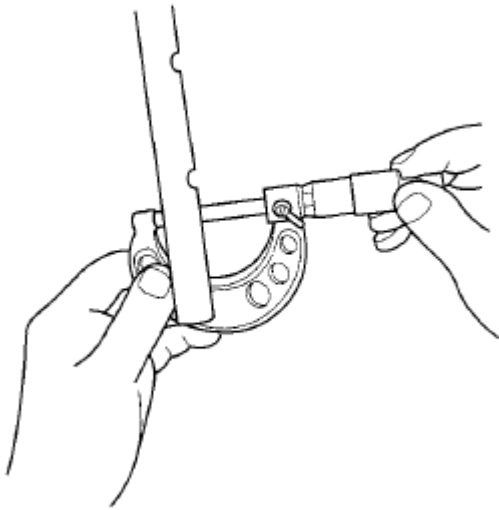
Measuring Diameter Of Shaft At First Rocker Location
